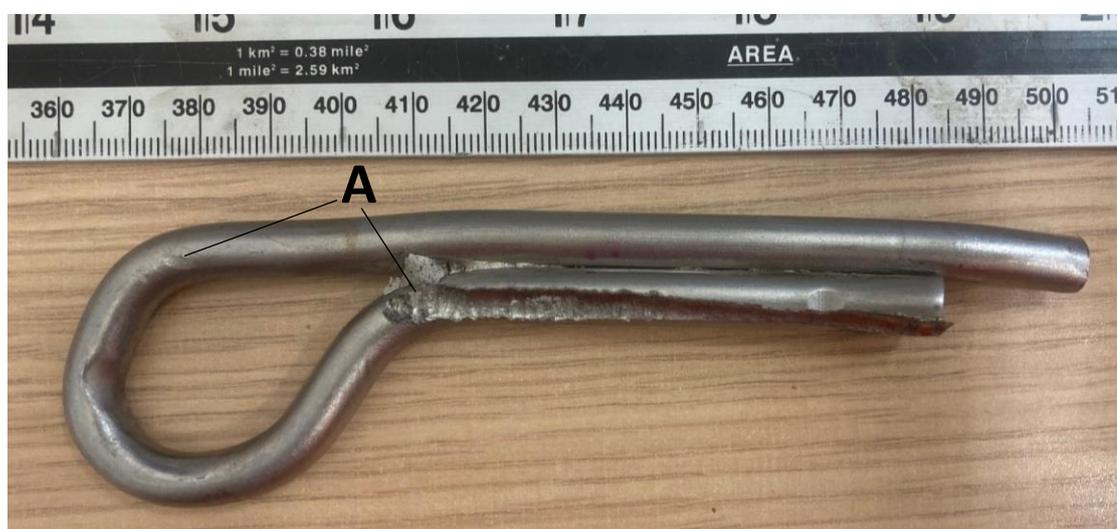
DMM 98A Right side view note drill marking down leg of anchor, 405-485mm.
